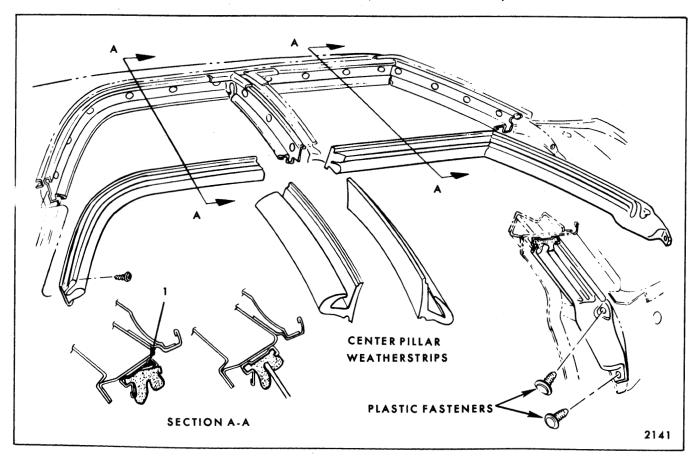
Side Roof Rail and Center Pillar Weatherstrips - "C-69" Styles
